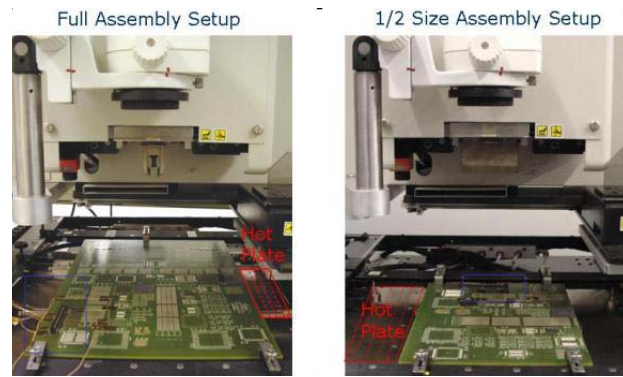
“As Assembled” and the “resized” HP Yunque board.
